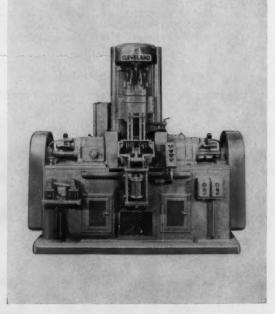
Lead-screw automatic pipe fitting tapping machine
